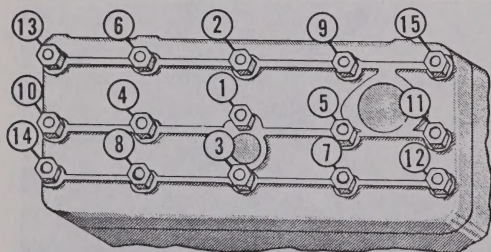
Cylinder Head Tightening Sequence — Four Cylinder
